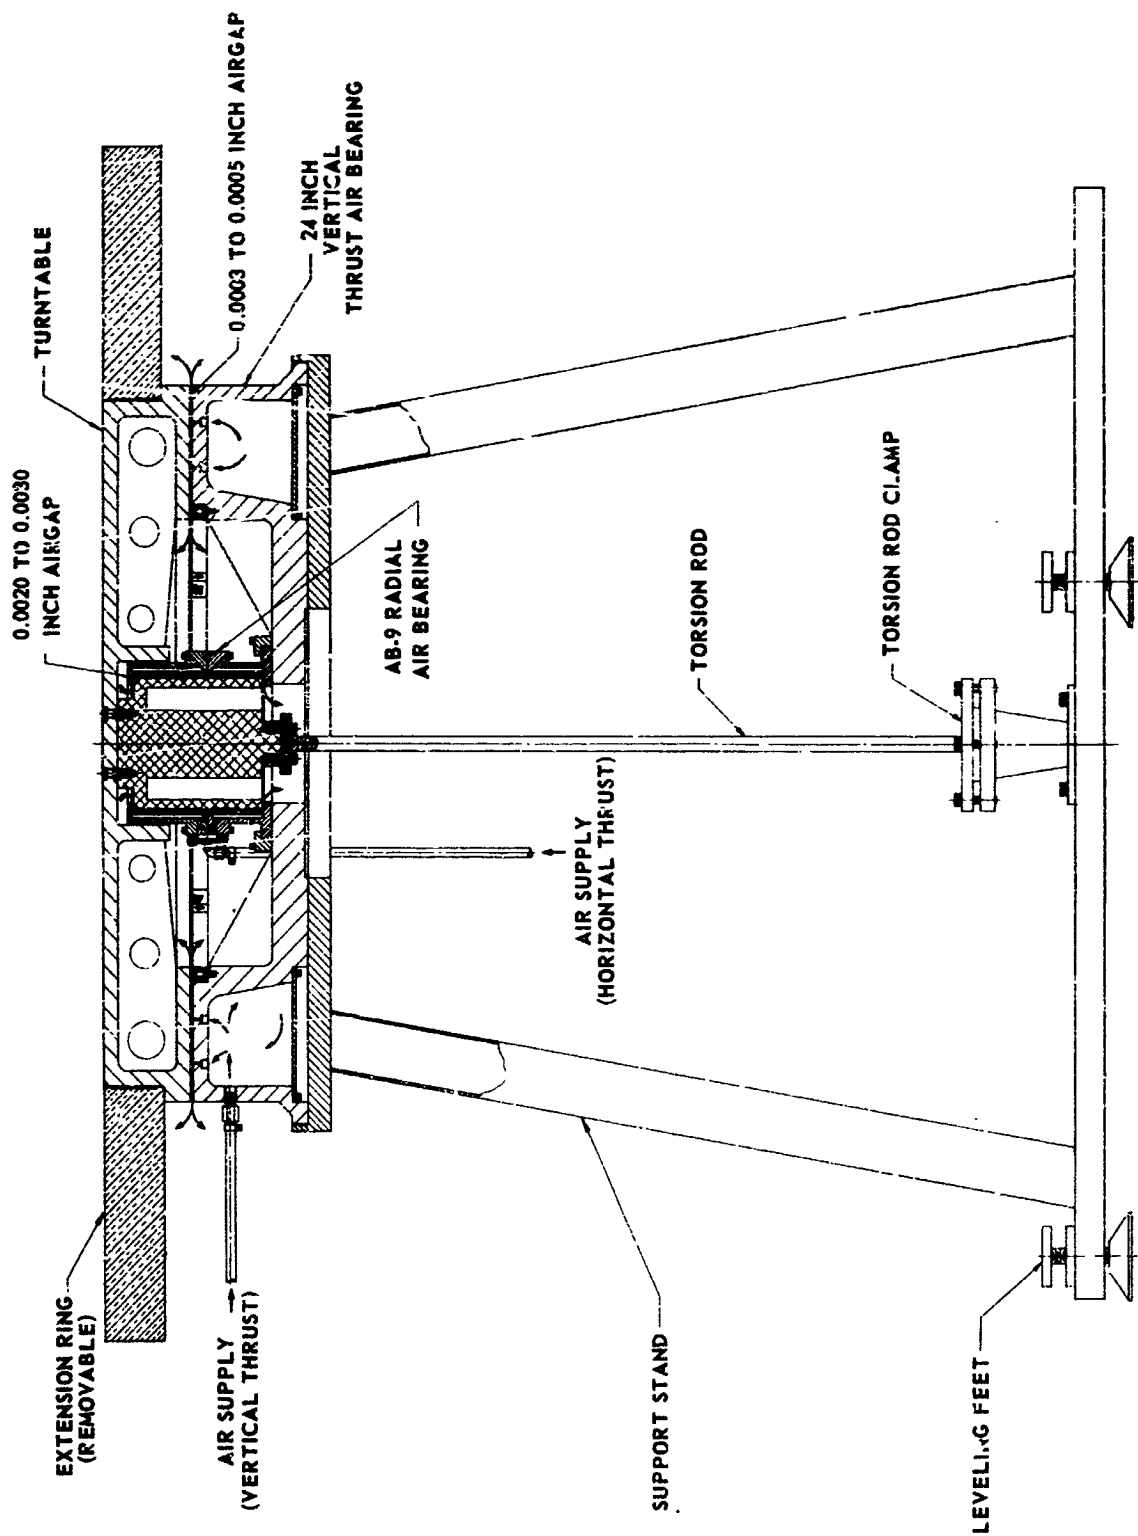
24 INCH AIR BEARING TABLE AND STAND
